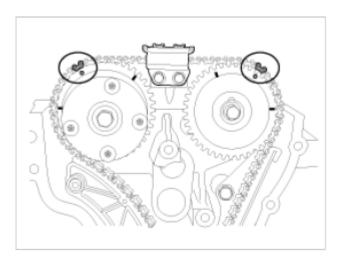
Identifying Timing Mark On Exhaust Camshaft Sprocket And Intake Camshaft Sprocket
